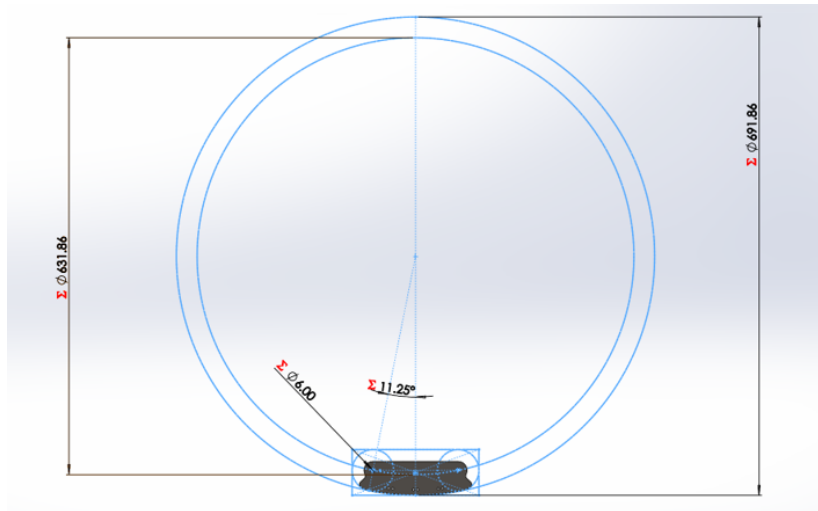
Front view of the refined CAD design, showing the calculated circular geometry.
